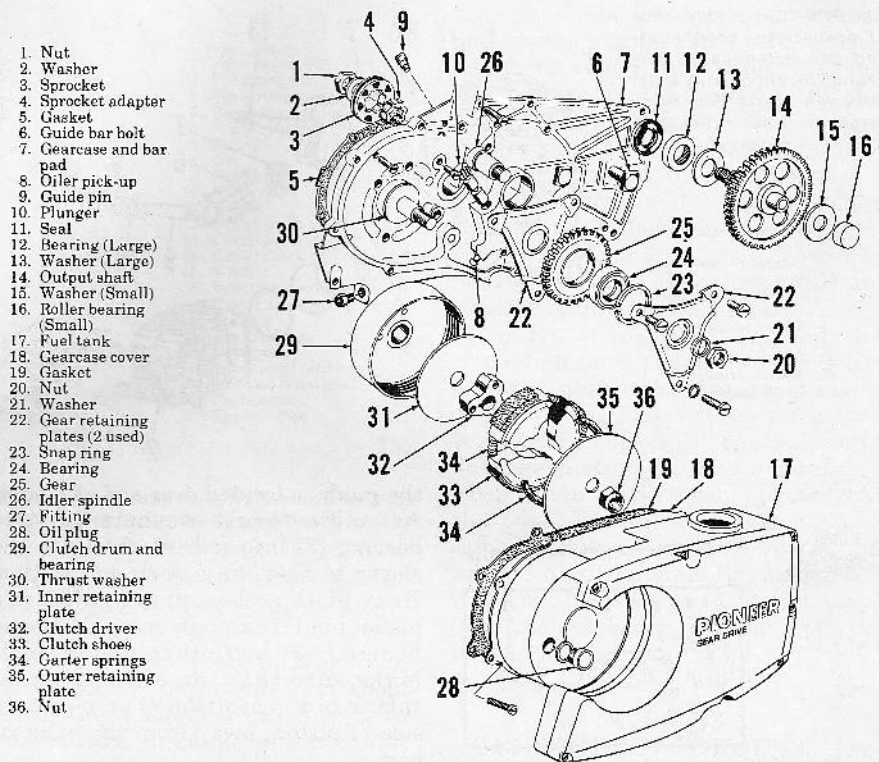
Exploded view of gearcase and clutch assembly typical of 1520 and 1560 models. Automatic chain oiler (parts 8, 9 & 10) is not used on all models.
